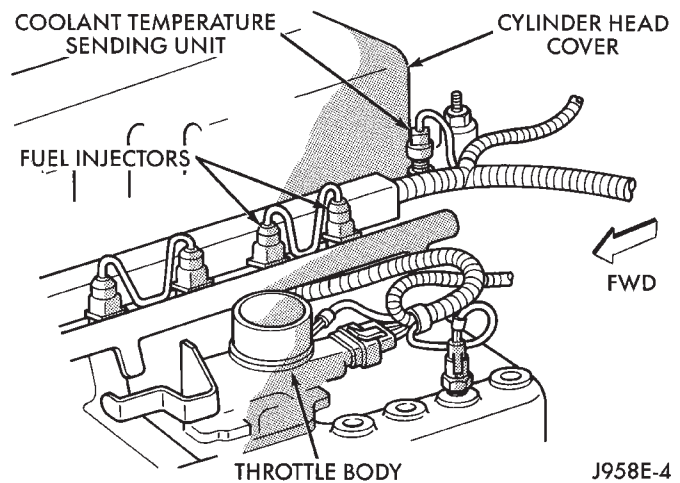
Coolant Temperature Sending Unit - 4.0L Engine
